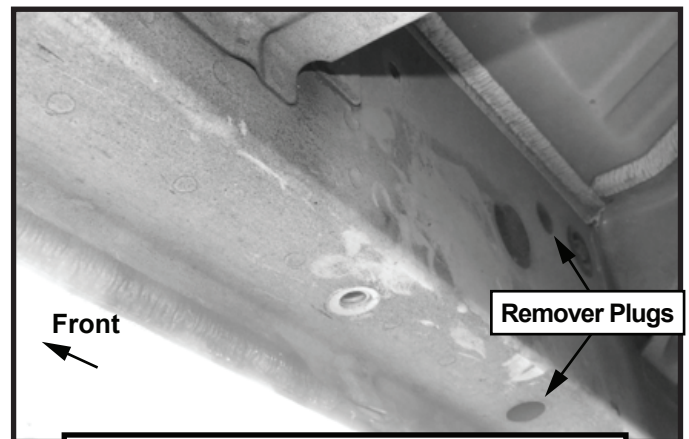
Remove plastic plugs to uncover threaded inserts at front mounting location (if any)
